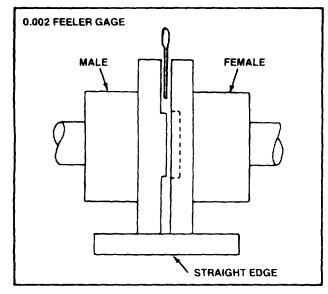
Checking Parallel Alignment of the Coupling Edges
